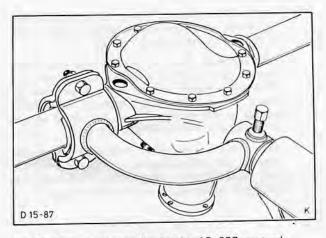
Rear axle in mounting bracket 15-057 on stand
